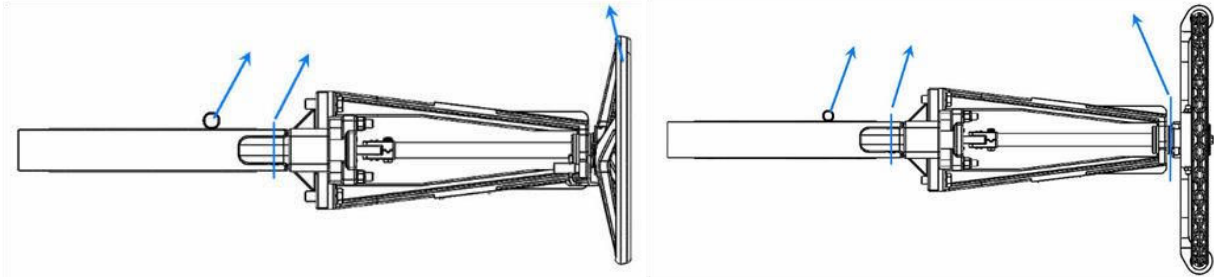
Knife Gate Valve with Handwheel or Chainwheel Actuator, Horizontal Lifting
